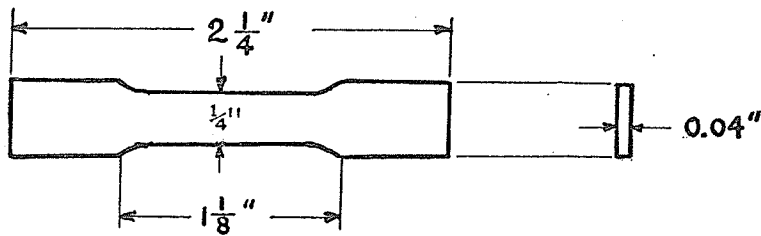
Dimensions of the Fe 3% Si Specimen.
